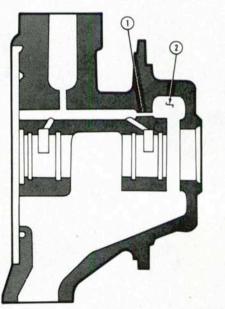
Sectional view of turbocharger center housing showing lubrication passages and oil passage orifice (1) in turbine end oil cavity (2).
